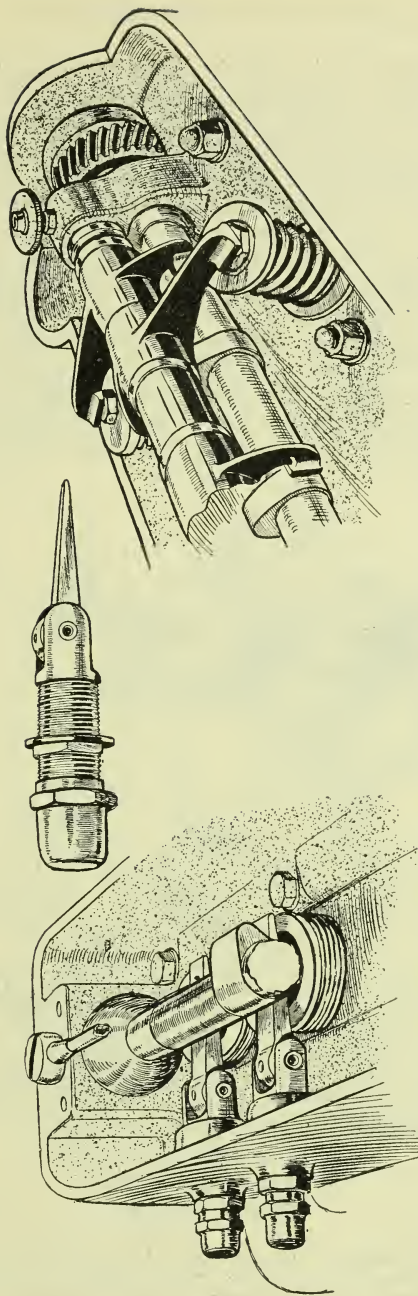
THE DIATTO CAM MECHANISM (AT THE LEFT) THAT EMPLOYS PIVOTED AND TAPERED TONGUES INTERPOSED BETWEEN THE CAMS AND THE VALVES AND (AT THE RIGHT) THE OVERHEAD CAMSHAFT OF THE ANSALDO ENGINE THAT USES ROCKING LEVERS WITH BEARINGS ON A SHAFT IMMEDIATELY ABOVE AND RUNNING PARALLEL TO THE CAMSHAFT
